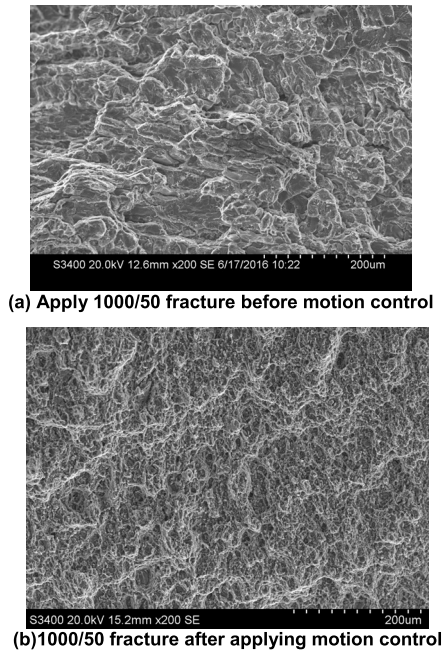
Welding joint fracture before and after motion control.
